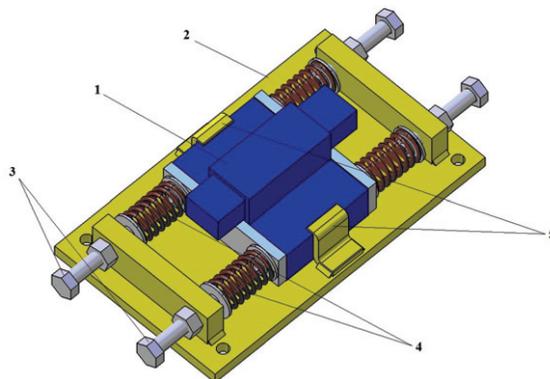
Valve holder: 1 – hydraulic valve (distributor), 2 – holder base, 3 – spring pre-deflection bolts, 4 – springs, 5 – securing catches
